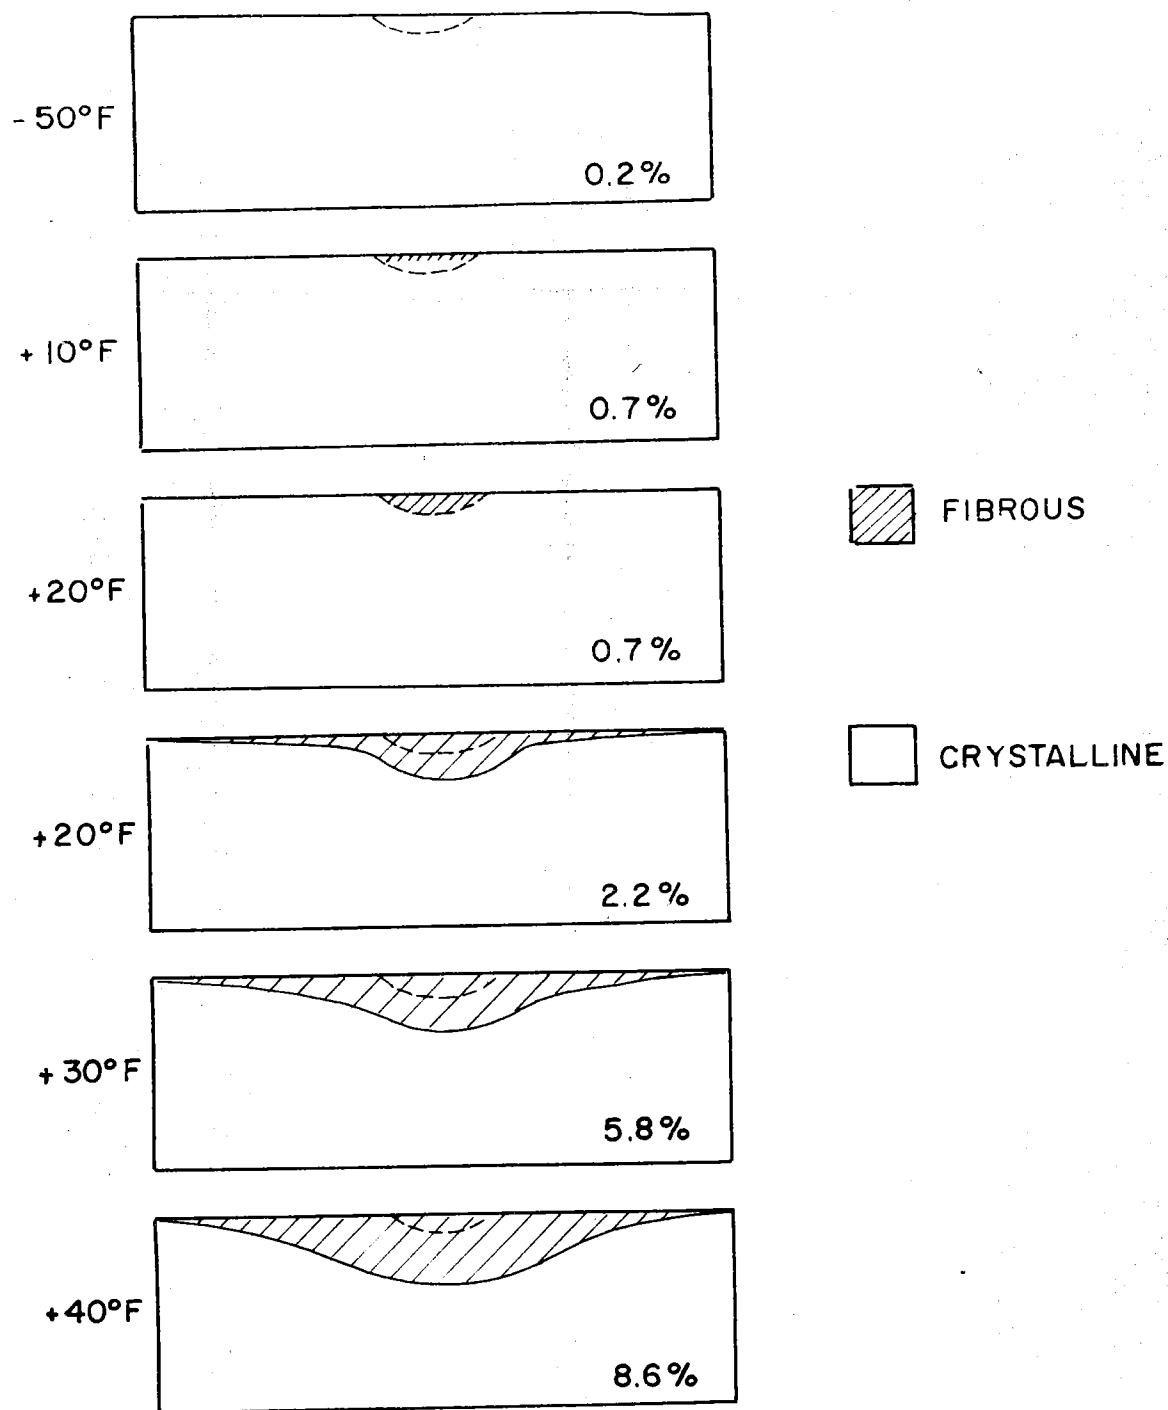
Fracture Behavior of Kinsel Specimens of A-201 Steel Welded with E7015 Electrodes.
